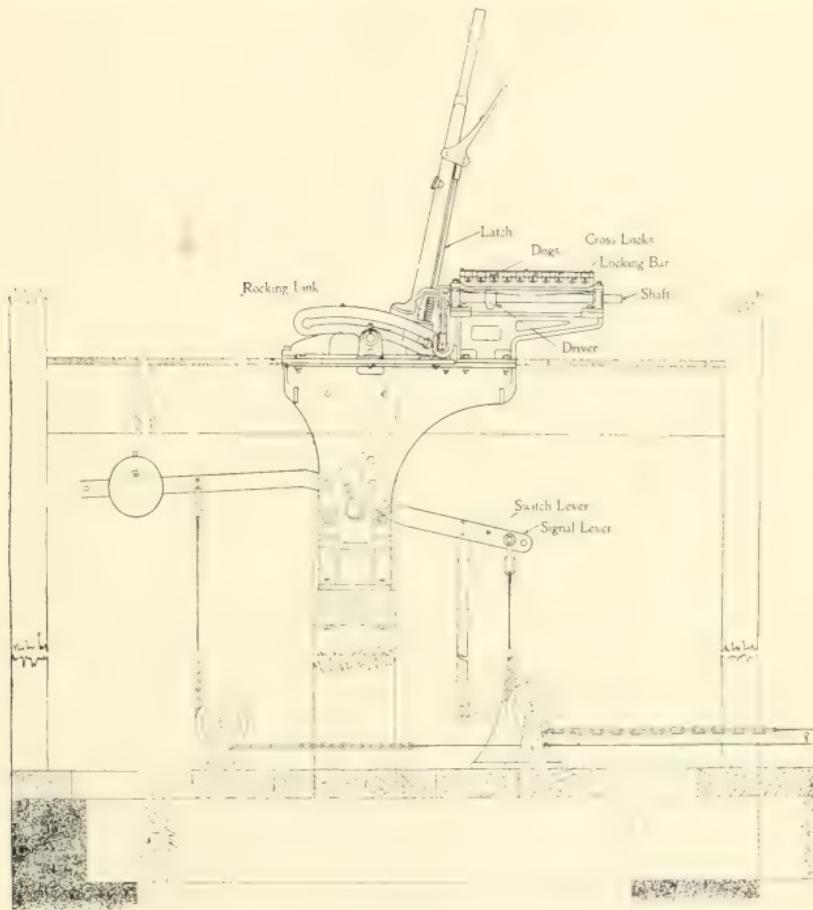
END VIEW OF SAXBY AND FARMER INTERLOCKING MACHINE WITH CONNECTIONS AS LOCATED IN TOWER
